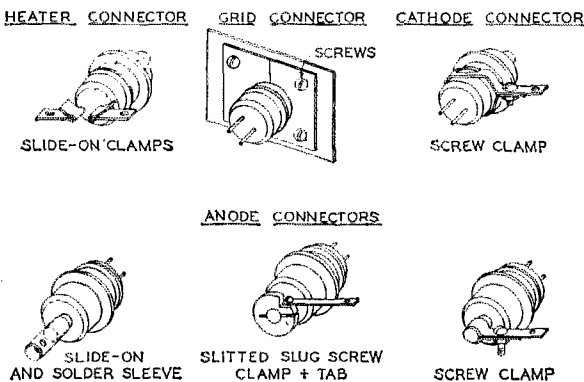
Suggested methods of connecting to the elements of the 7768 triode in u.h.f. circuits. Heater connections may also be made with contacts removed from a conventional tube socket, or by soldering directly to the tube pins.
